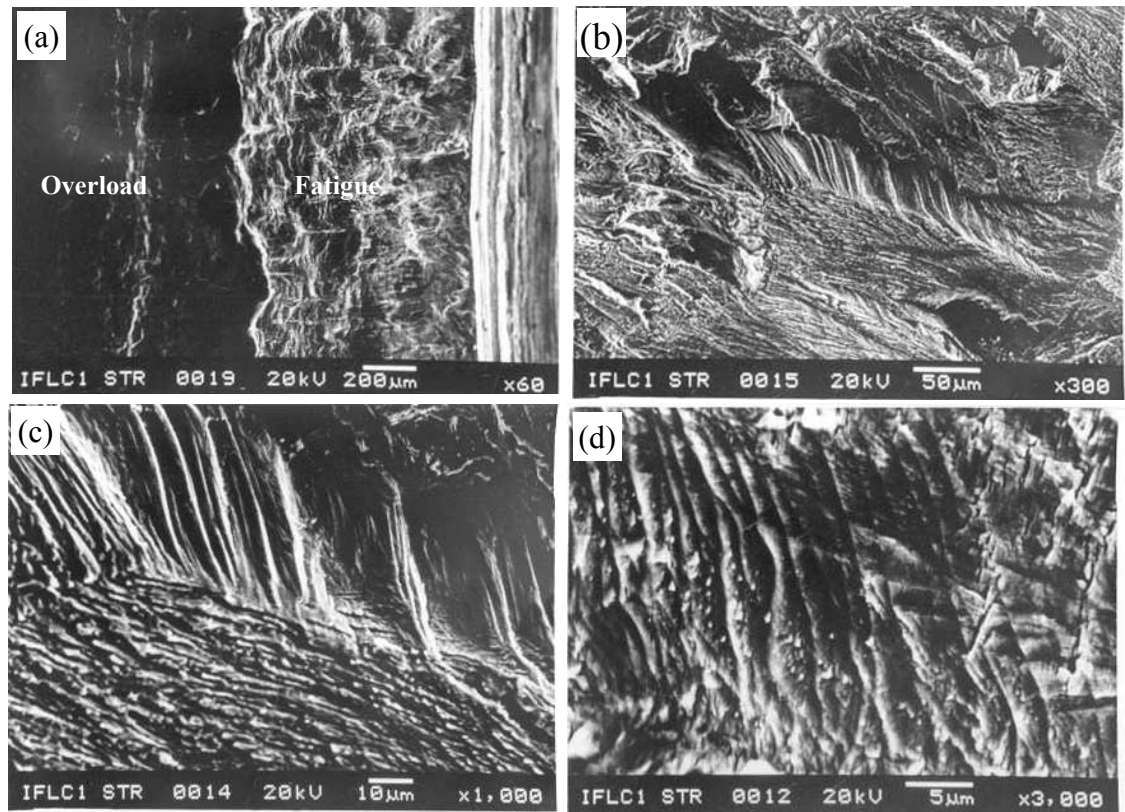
Characteristics of fatigue fractured surfaces of S00 steel: (a) fatigue and overload fractured regions, (b) river lines on a cleavage facet, (c) magnified view of a part show in (b) and (d) striations at higher magnification.
